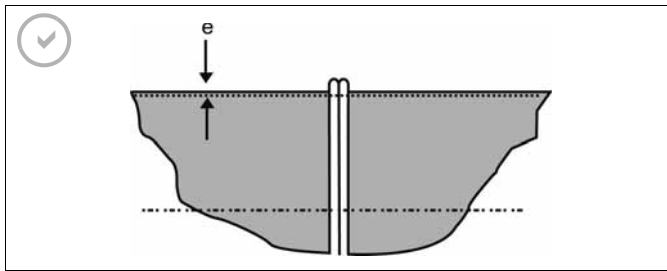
Butt-weld with identical welding beads (good)
